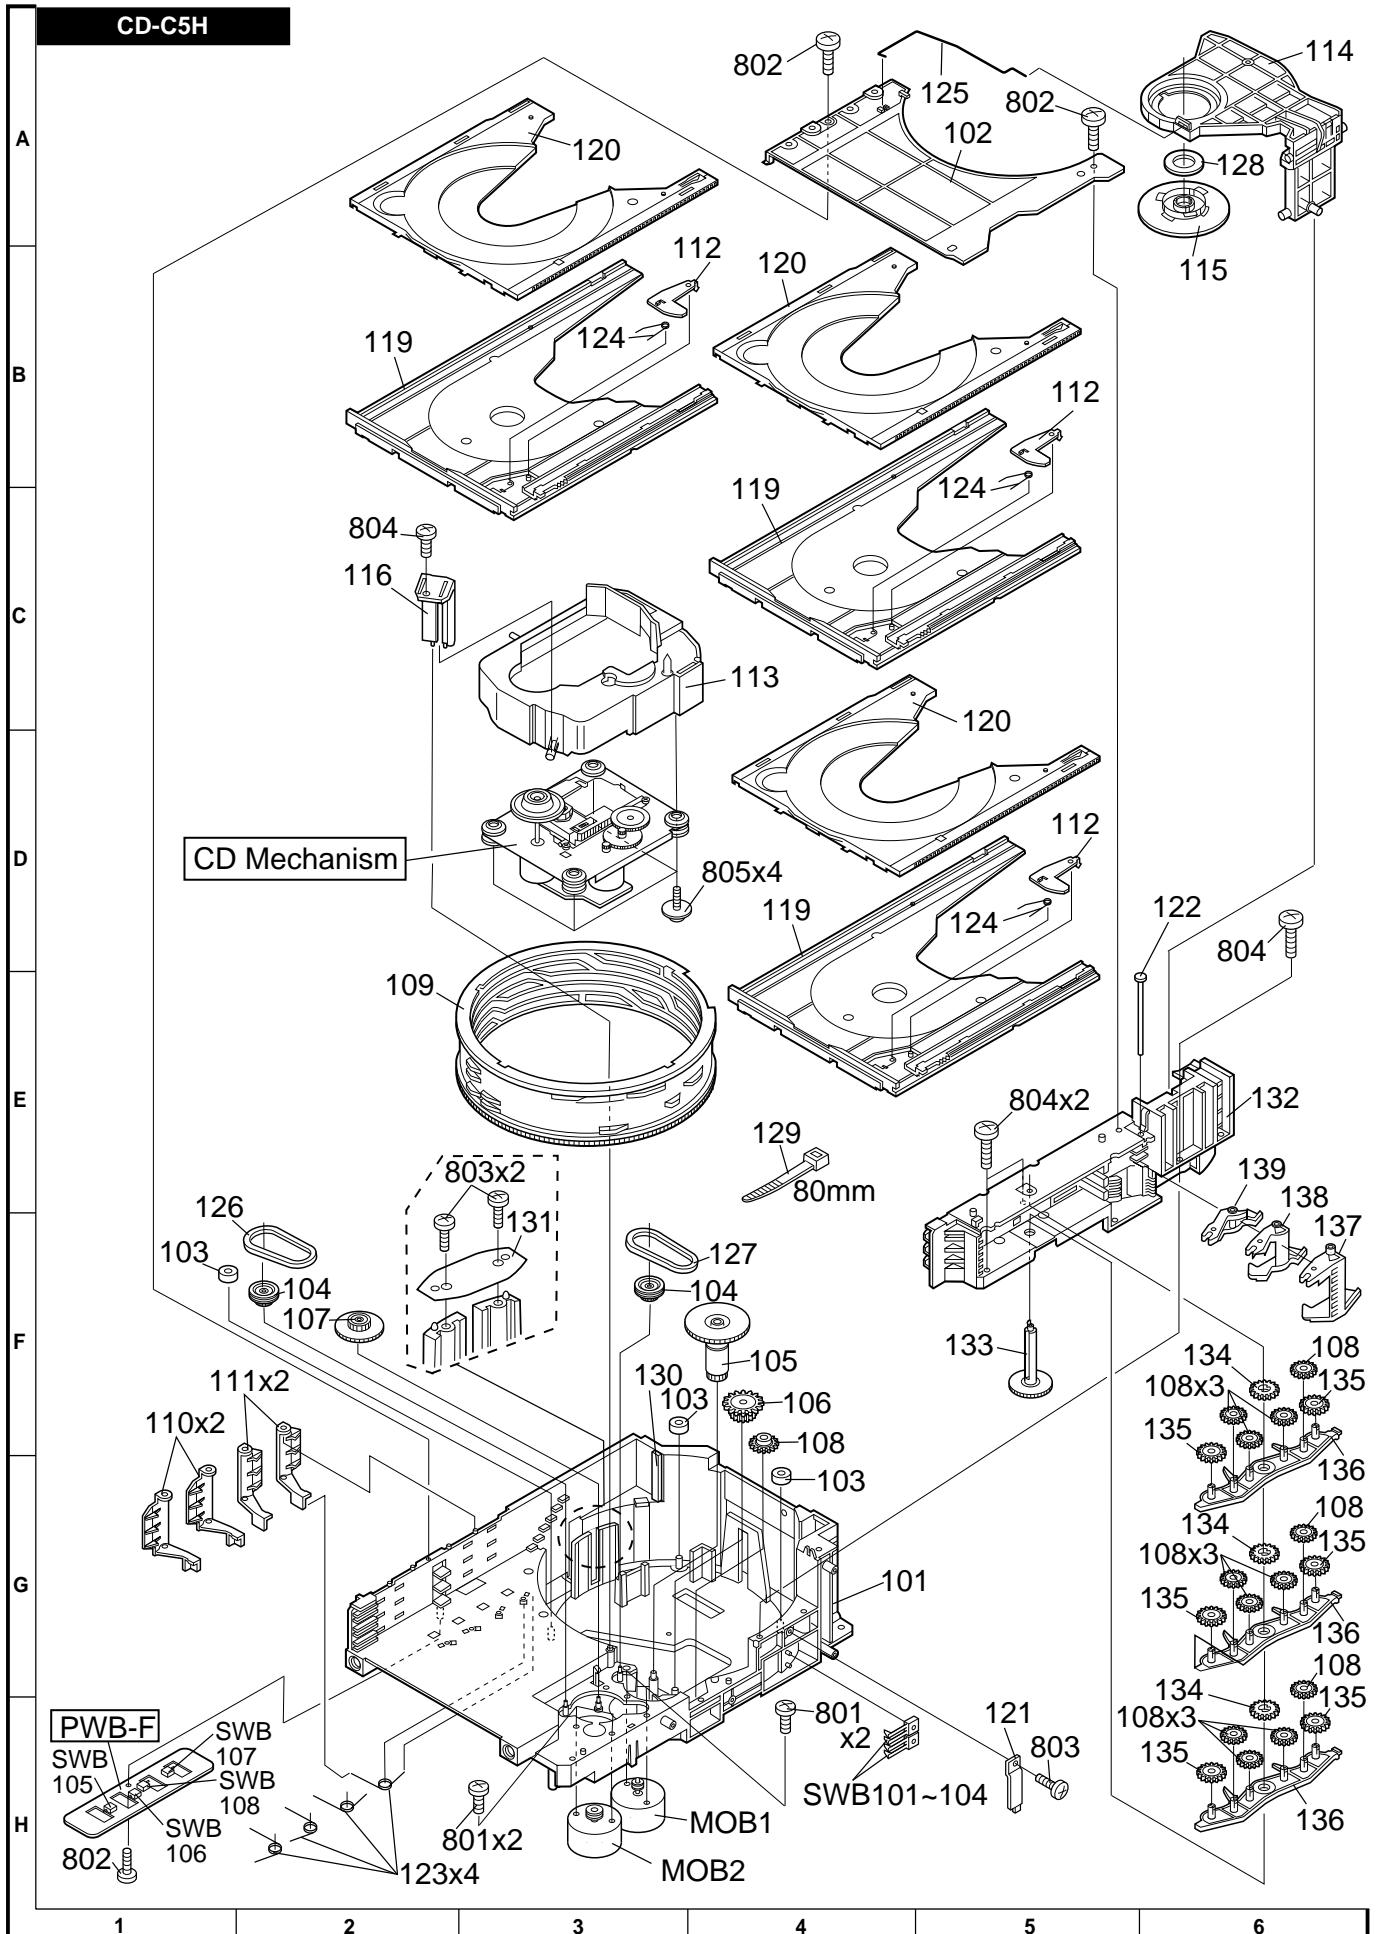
CHANGER MECHANISM EXPLODED VIEW
